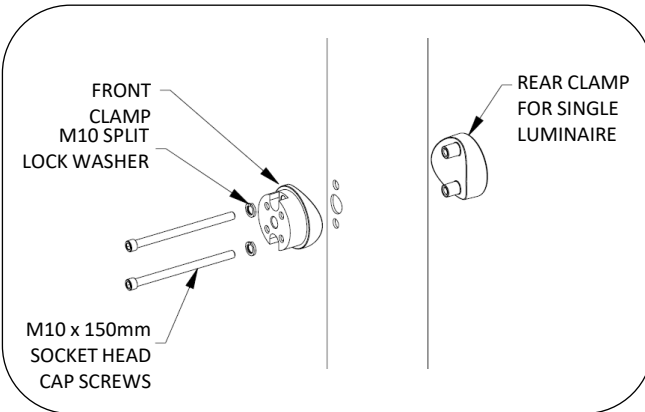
INSTALL SINGLE LUMINAIRE CLAMP
